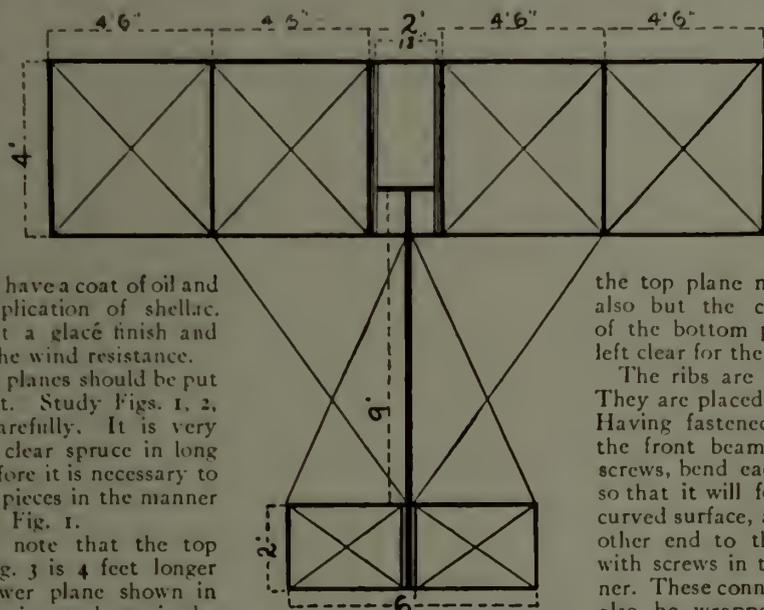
Ground plan of glider showing bracing and horizontal rudder
